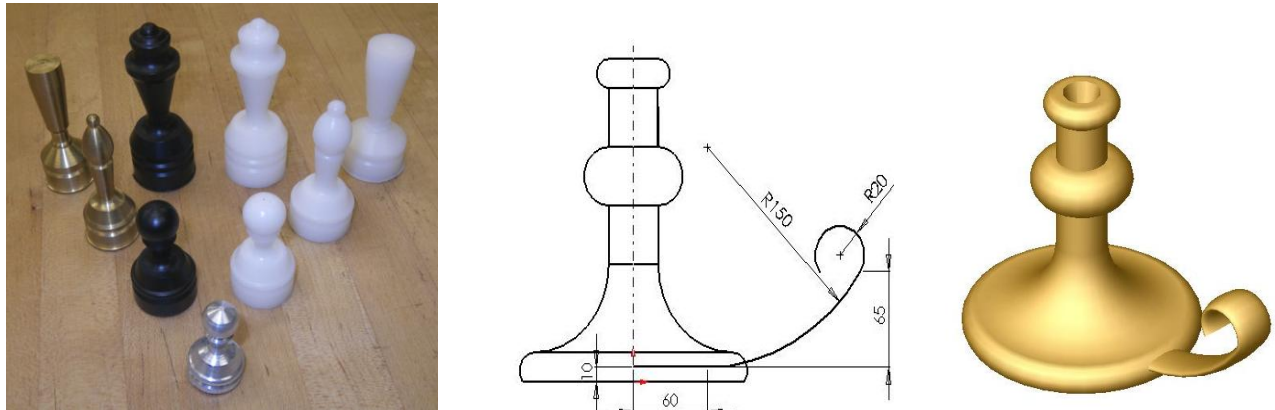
Examples of engineering projects in CNC machine and SolidWorks CAD
